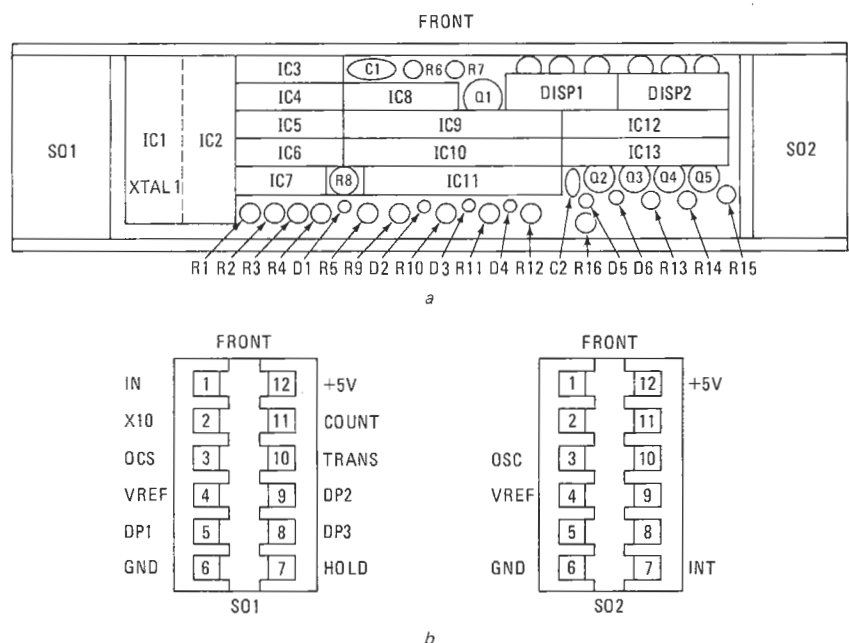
INTERNAL LAYOUT of probe showing component placement. Location of signals on socket pins is shown in b.
